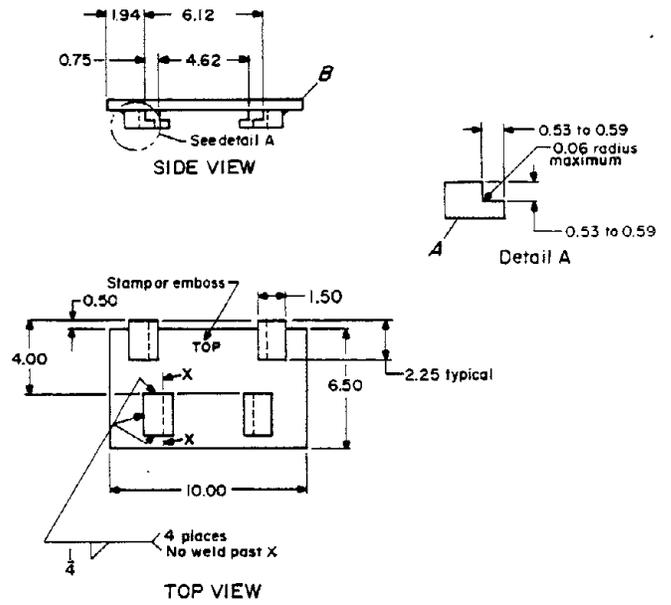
Bar and plate used in swing-arm boom, with assembly details.
